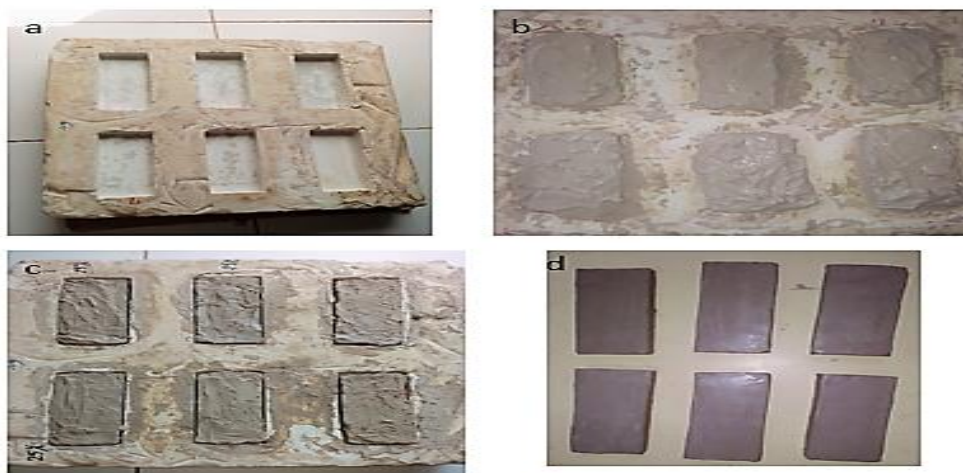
a) Plaster mold b) Barbotine poured into the mold c) 48h after casting d) Test tubes removed from the mold
